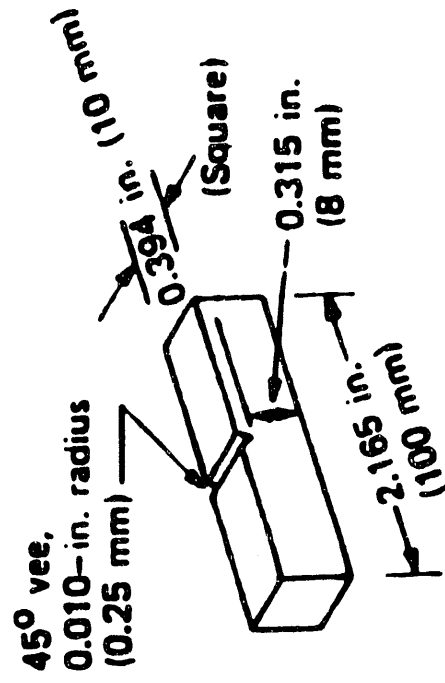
Diagram of a Charpy specimen machined to specifications [after Ref. 3]
